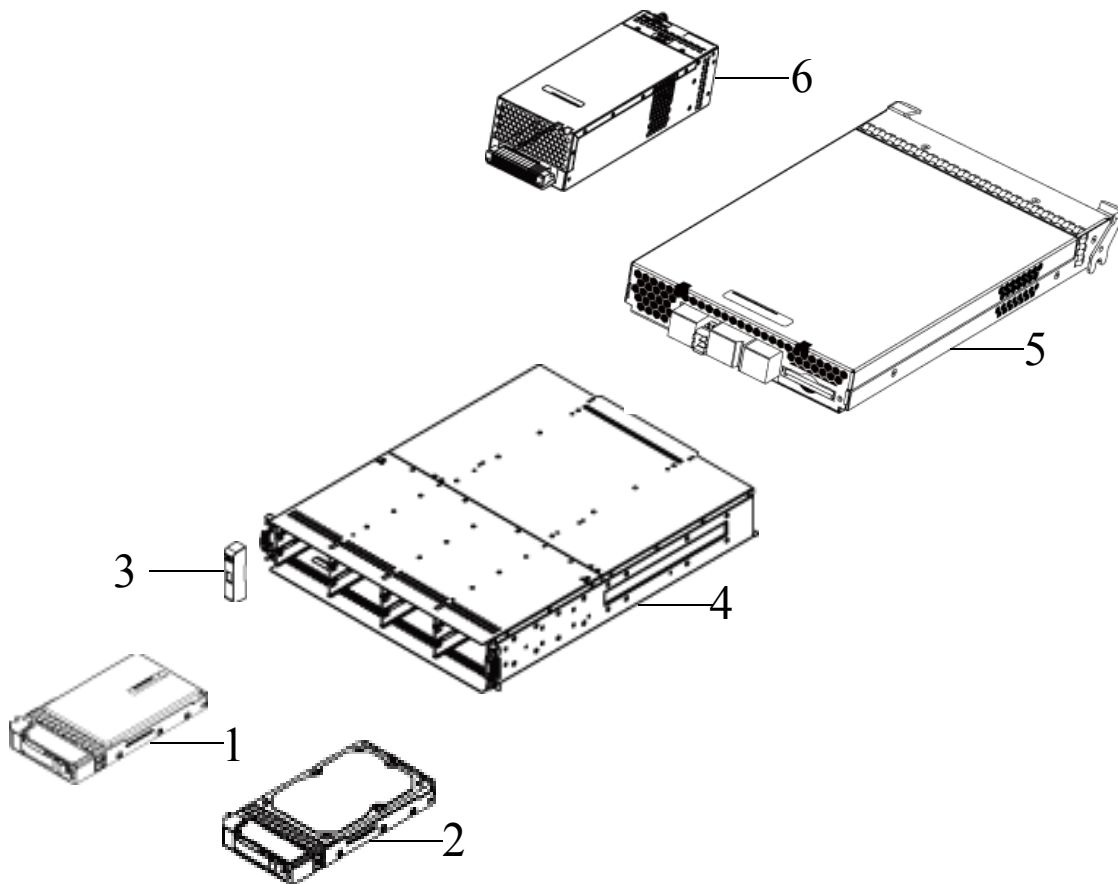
MSA2000 3.5 12-drive enclosure exploded view
